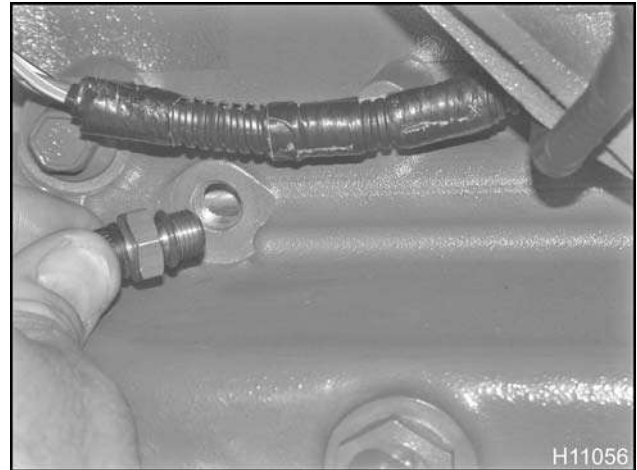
Removing the fuel valve assembly (air bleed and pressure test port)
